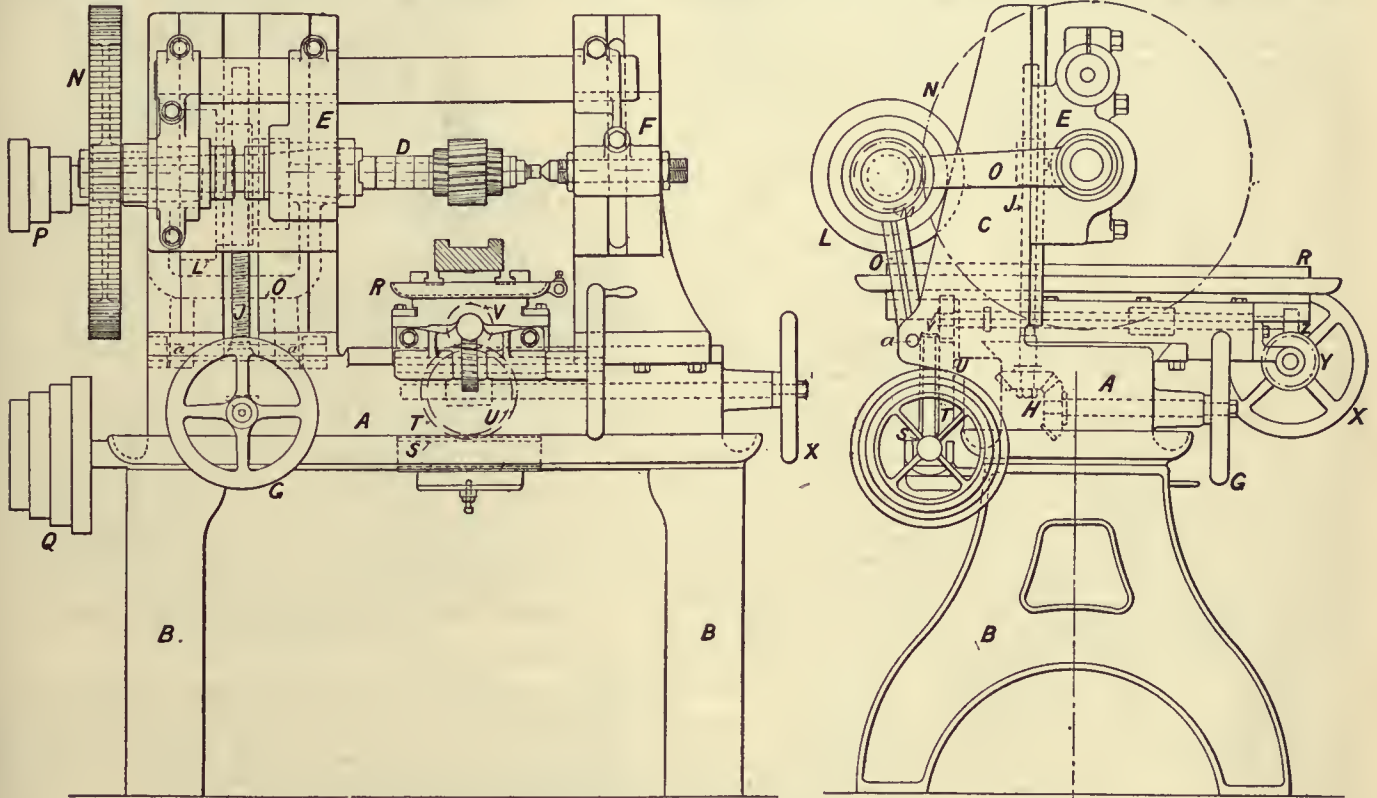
Lincoln Milling Machine. (John Holroyd & Co., Ltd., Milnrow.)
